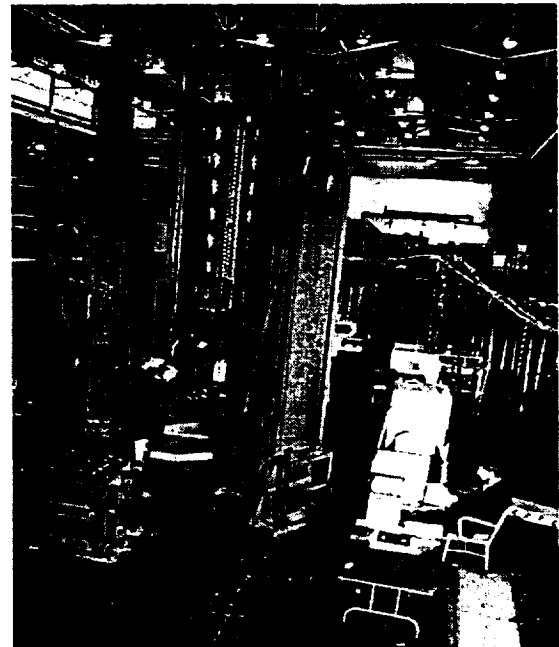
Vertical Weld Tool setup including control cabinets and stanchion supports for full scale hardware demonstrations.
